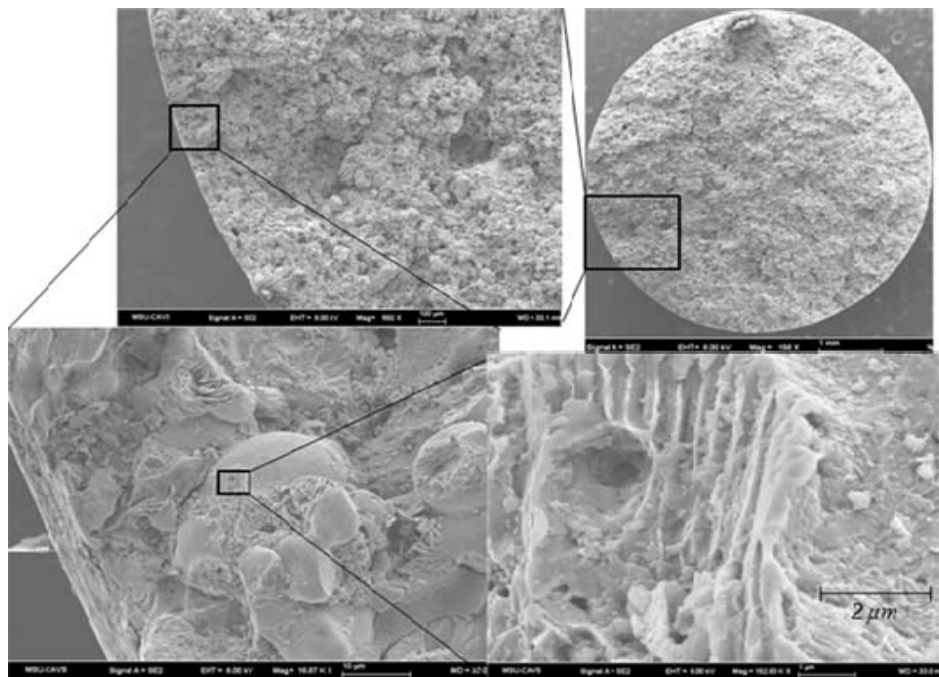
Fracture surfaces of fatigue Specimen C.
